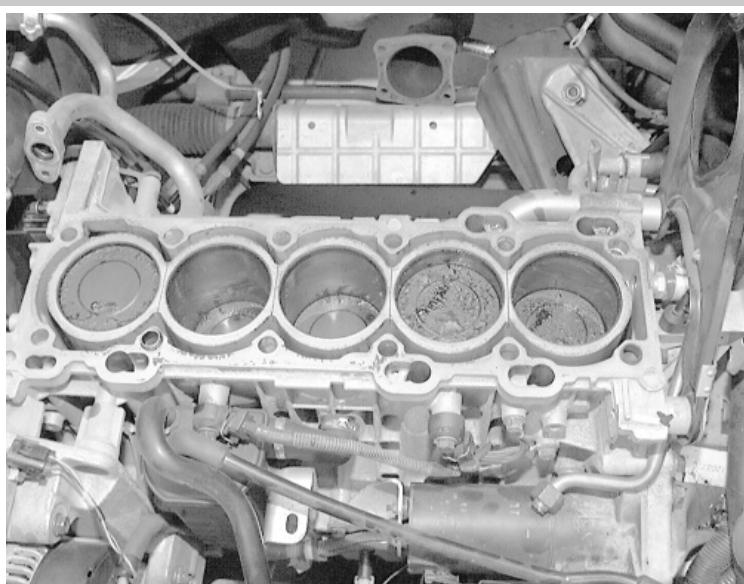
After the head is removed, inspect the block for damage, cracks, and obvious wear
